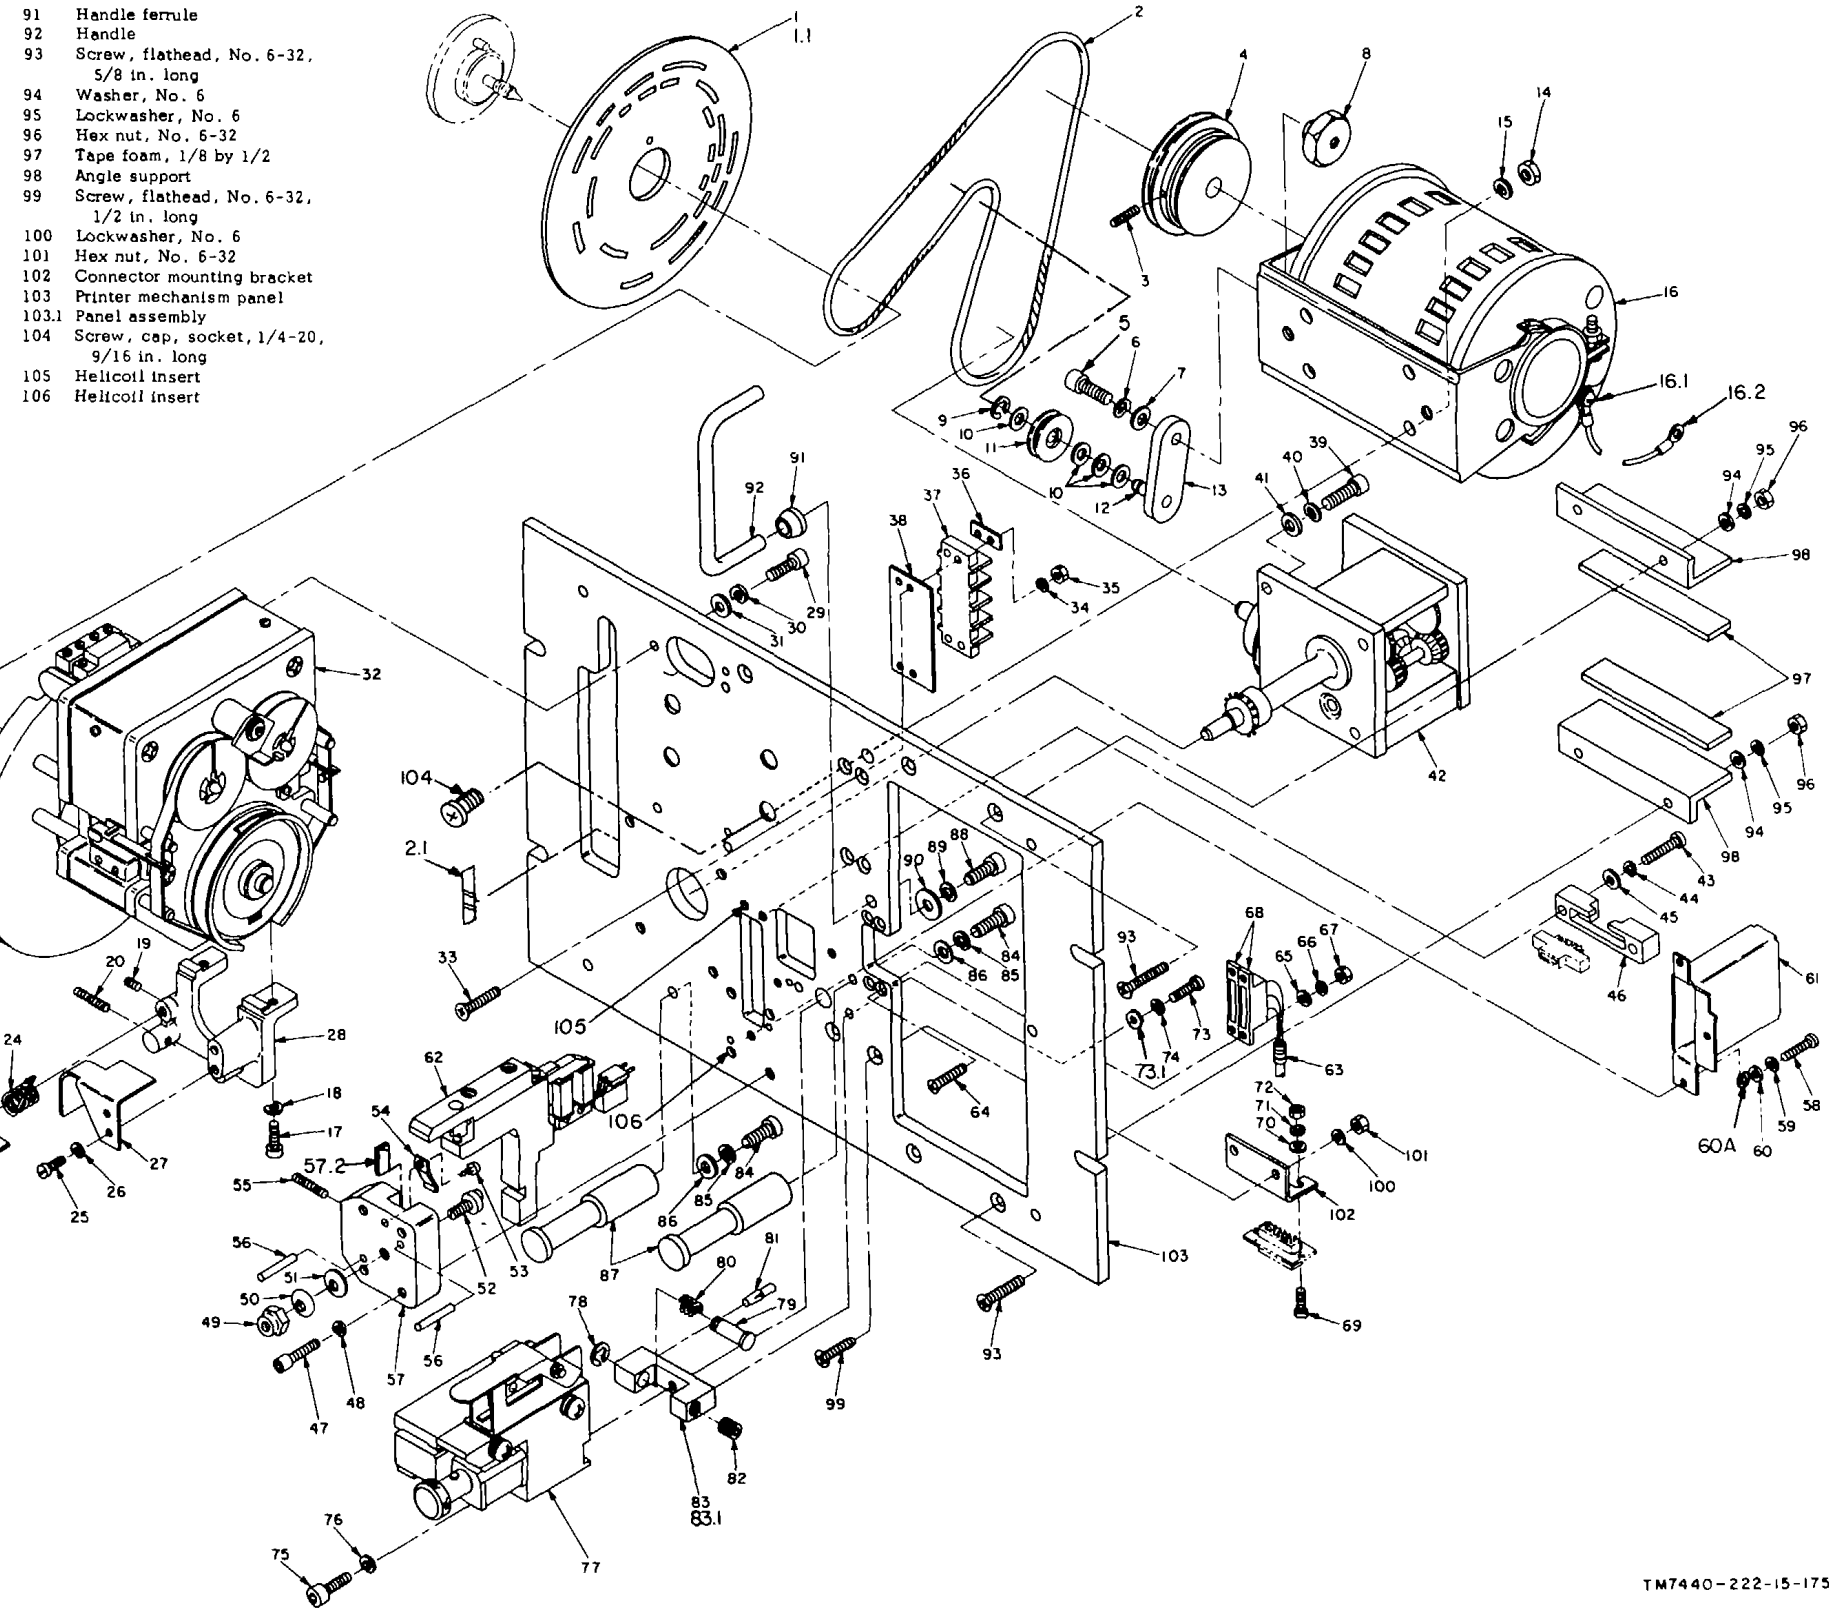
Printer mechanism and panel assembly, exploded view.
